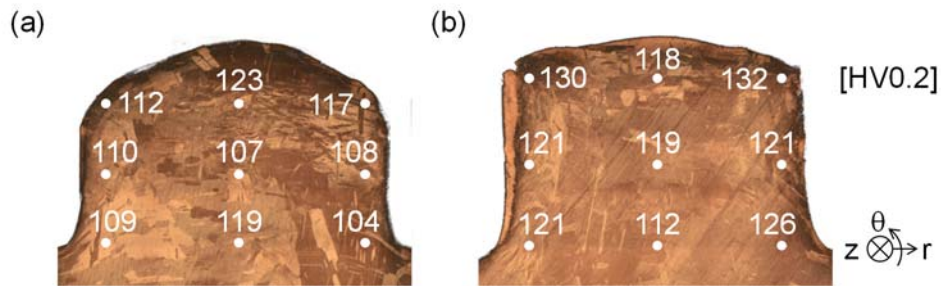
Experimental results of Vickers hardness of C1100 copper workpiece at extruded tooth part in lateral extrusion ($s = 5.2$ mm, initial hardness: 75 HV0.2); (a) no torsion, (b) cyclic alternating torsion.
